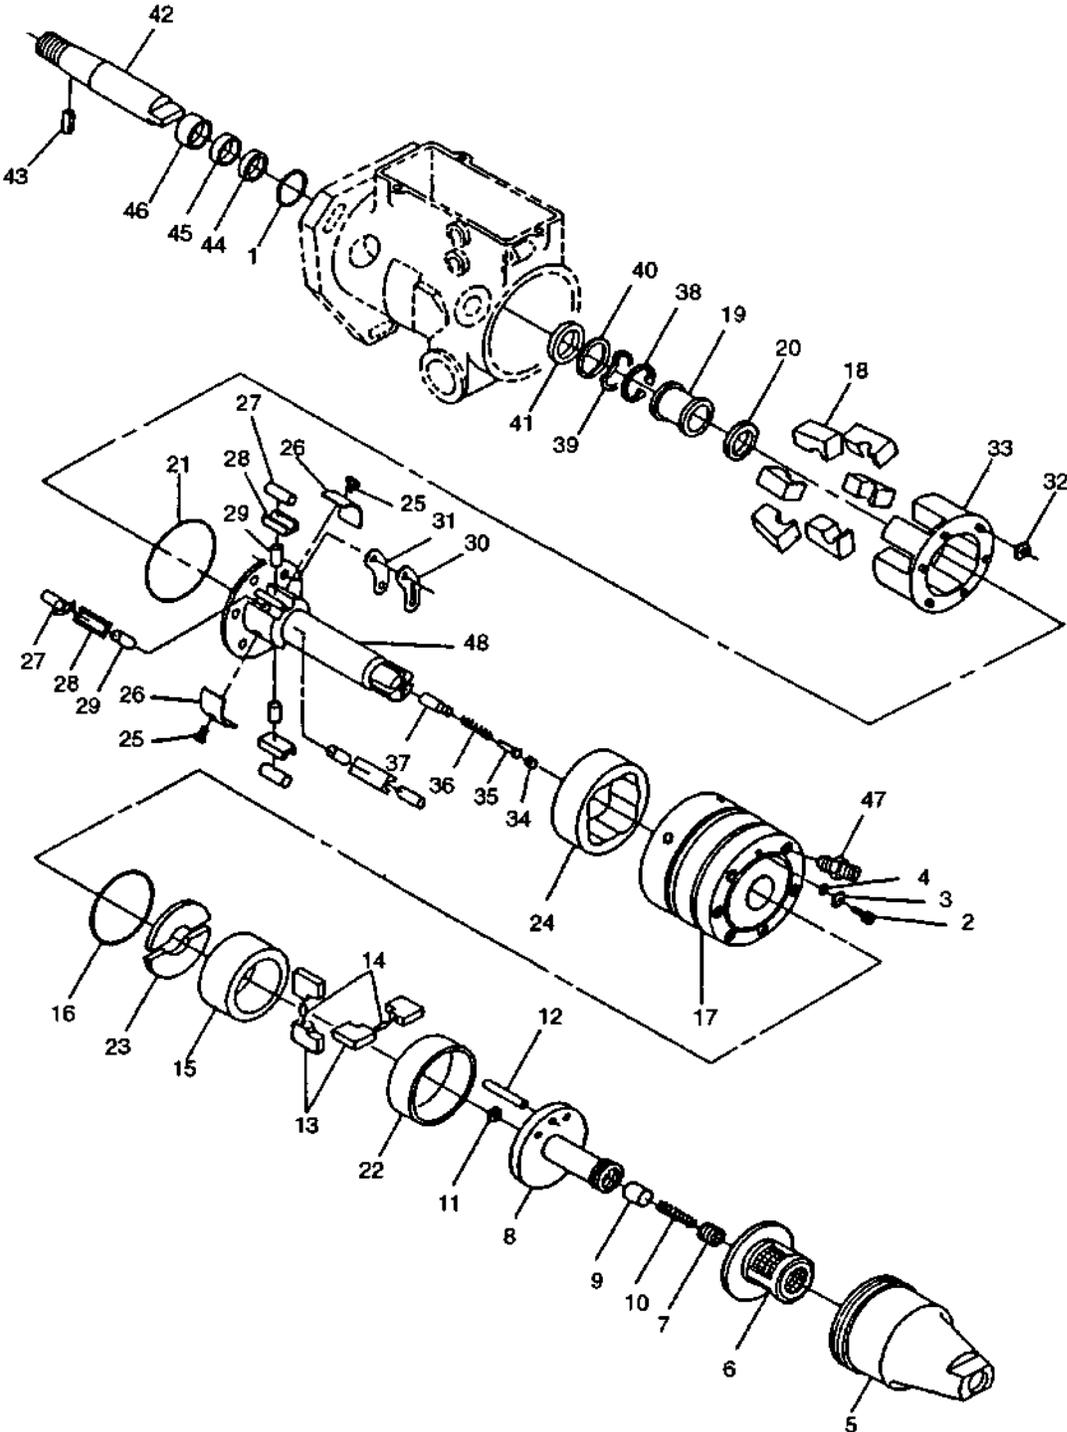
Fuel Injection Pump Hydraulic Head Assembly
